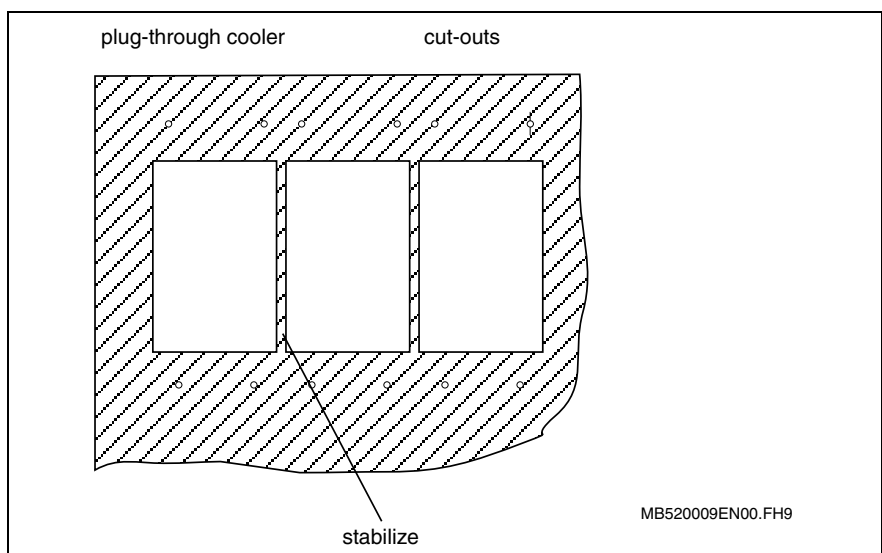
Cut-outs for devices with plug - through cooler
